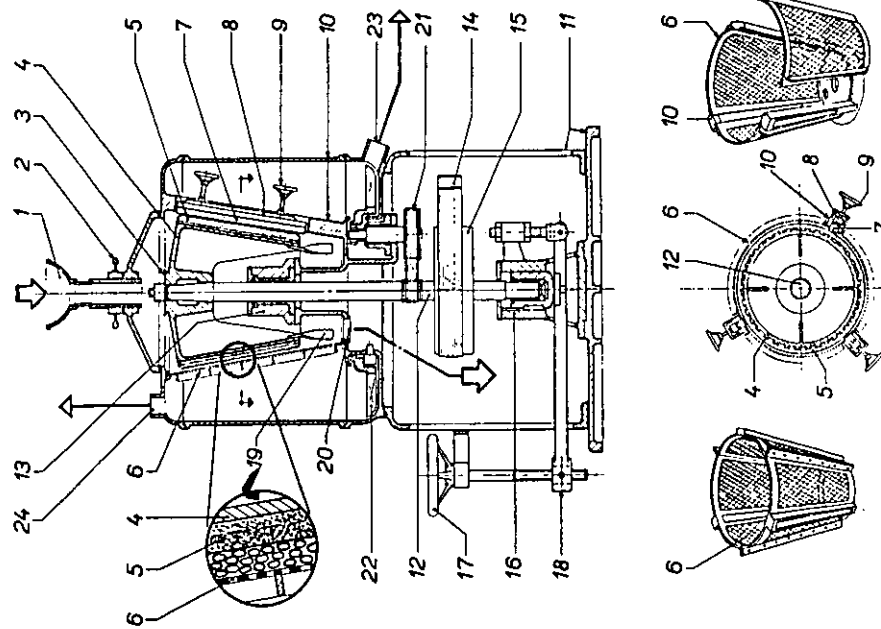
Abrasive cone mill. (1) Feed hopper. (2) Feed control handwheel. (3) Rotating cone clamping level. (4) Iron cone. (5) Cone abrasive surface. (6) Screen case (independent segment type) (bottom right). (7) Rubber brakes. (8) Rubber brake frame. (9) Rubber brake regulation handwheel. (10) Rotating cone housing. (11) Frame. (12) Cone shaft. (13) Upper bearing (central bearing-type cone). (14) Drive belt. (15) Drive pulley. (16) Lower bearing. (17) Screen and cone clearance adjustment handwheel. (18) Shaft supporting arm. (19) Milled rice conveyor. (20) Bran conveyor flight. (21) Bran conveyor drive pulley. (22) Bran conveyor flight. (23) Bran outlet. (24) Air suction outlet. Courtesy of Food and Agriculture Organization of the United Nations [Borasio and Garibaldi 1957].
